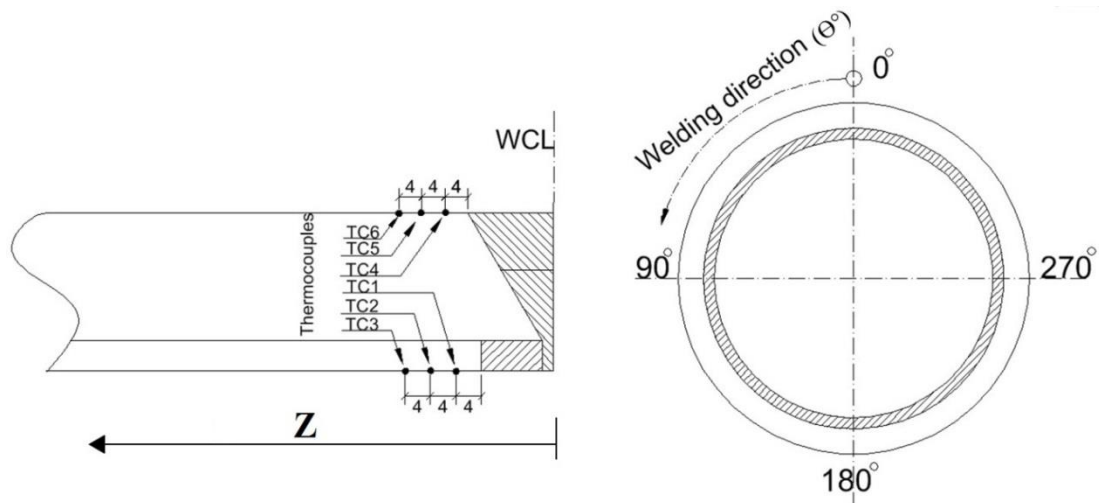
Locations of thermocouples and the welding direction for three passes, dimensions in mm
